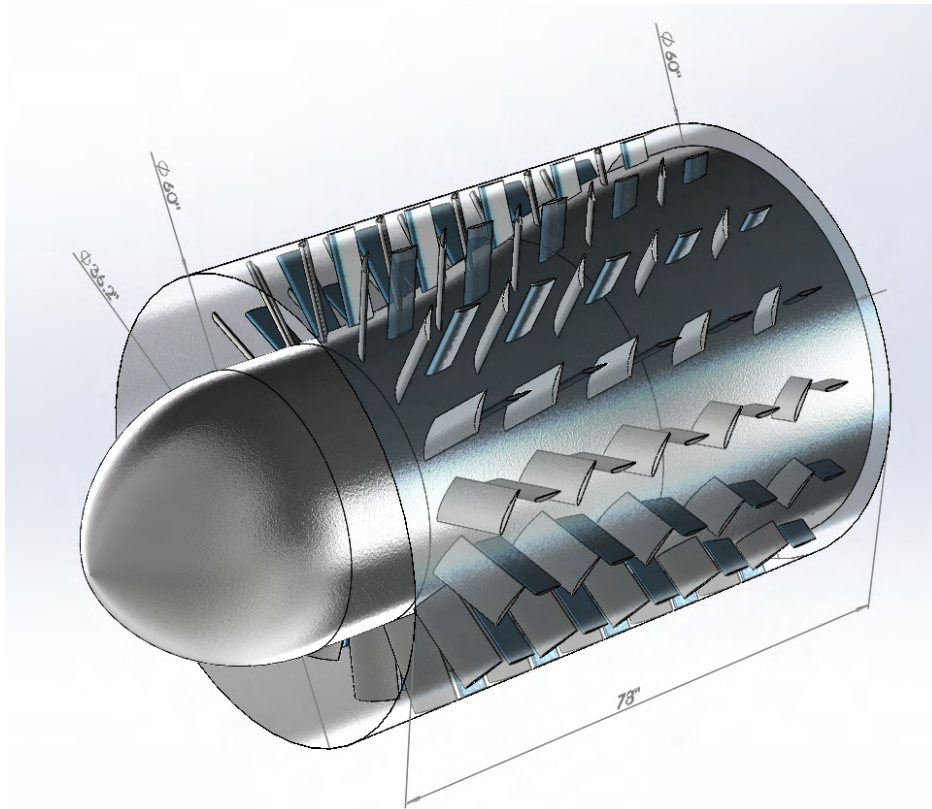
CAD of Compressor. Grey-Rotor, Blue Translucent Stator. Units in inches.
